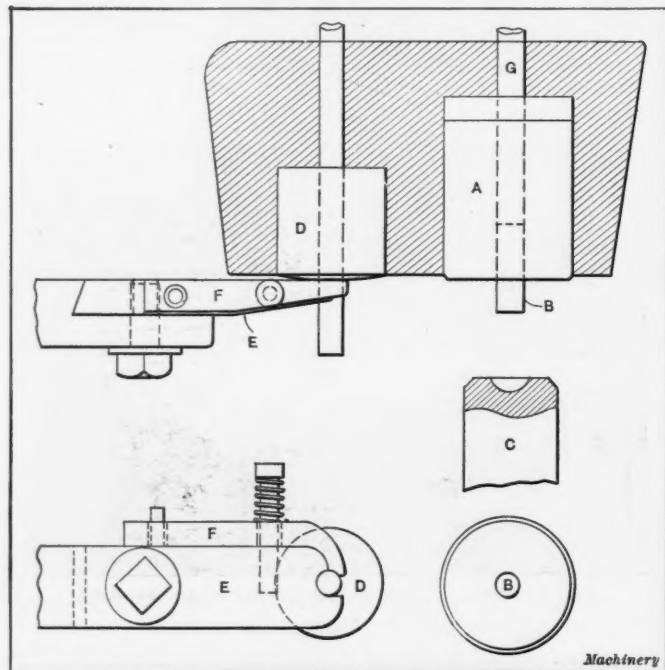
Section of Cold-header showing Locations of Principal Tools
